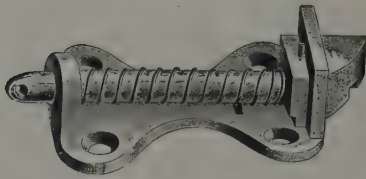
Sofa Bolt. Adams & Westlake Company.
